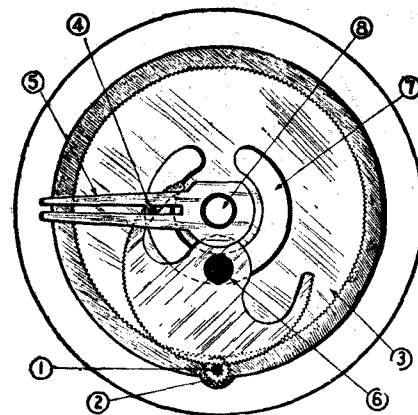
In this dial pinion 2 rotates plate 3, which carries the calibration scale. Pinion 1 moves the sector about the centre 6. Pin 4, fastened on sector, thus changes its radius in arm 5. The smaller the radius the faster arm 5 revolves about 8, which carries the condenser spindle.
